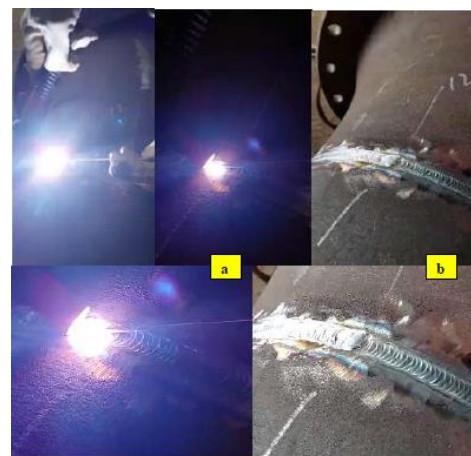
a. GTAW Welding Process and b. GTAW weld results on A106 Gr.B Carbon Steel Pipe
